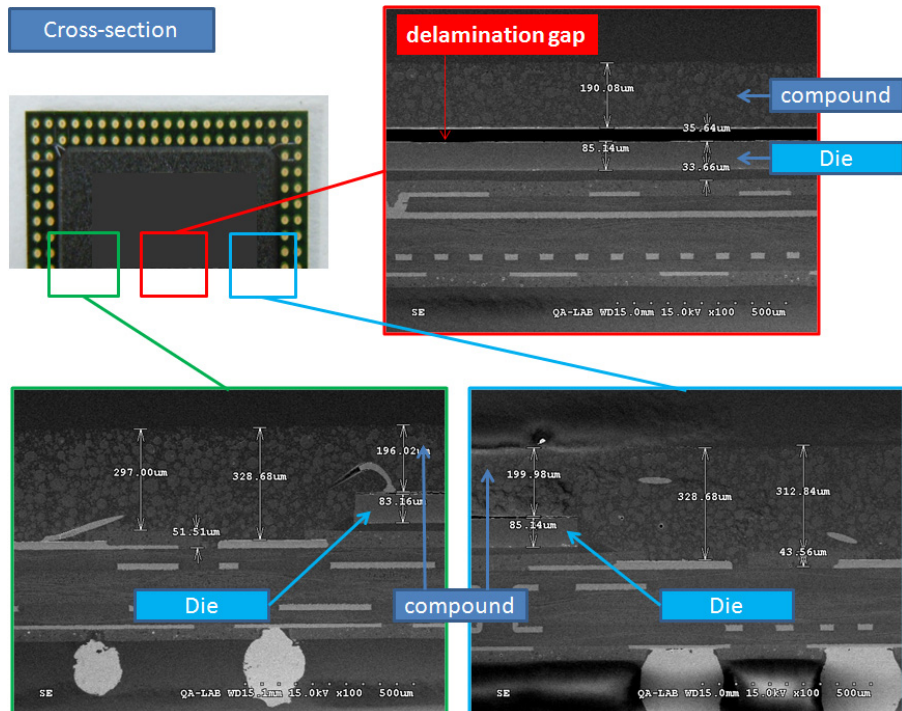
FBGA sample outline and cross-section images showing delamination defects in the package
